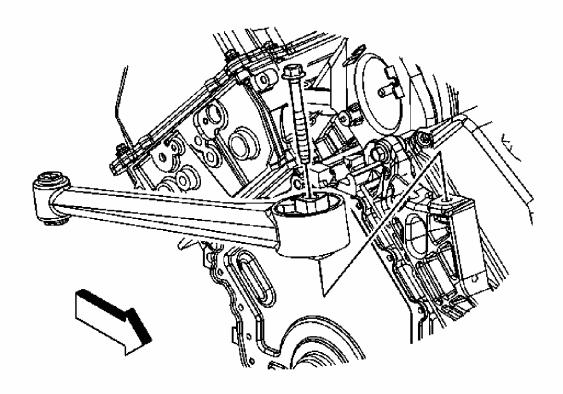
Identifying Engine Mount Strut Bolt Courtesy of GENERAL MOTORS CORP.
